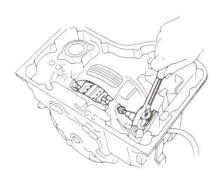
Adjusting the brake band anchor pin (Sec 8)
